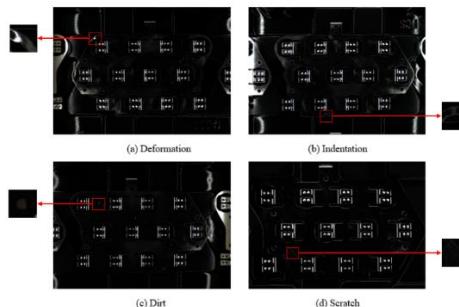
Typical Defect Examples of 4x4 Tray Pieces
